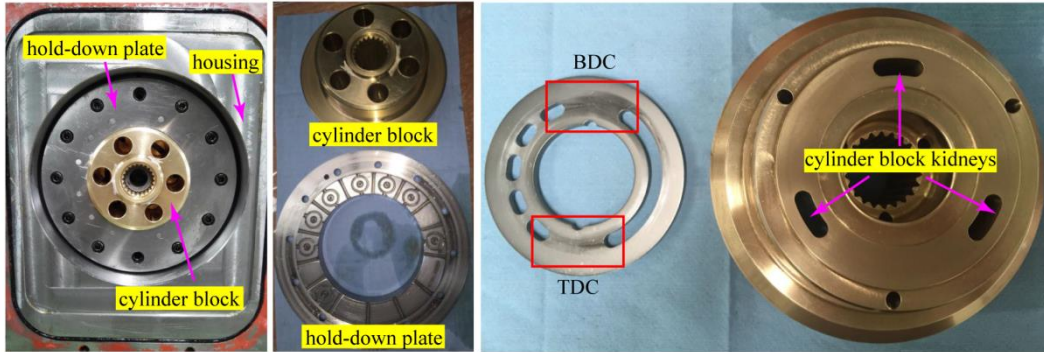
Photographic view of the cylinder block, hold-down plate, and valve plate after experiments
